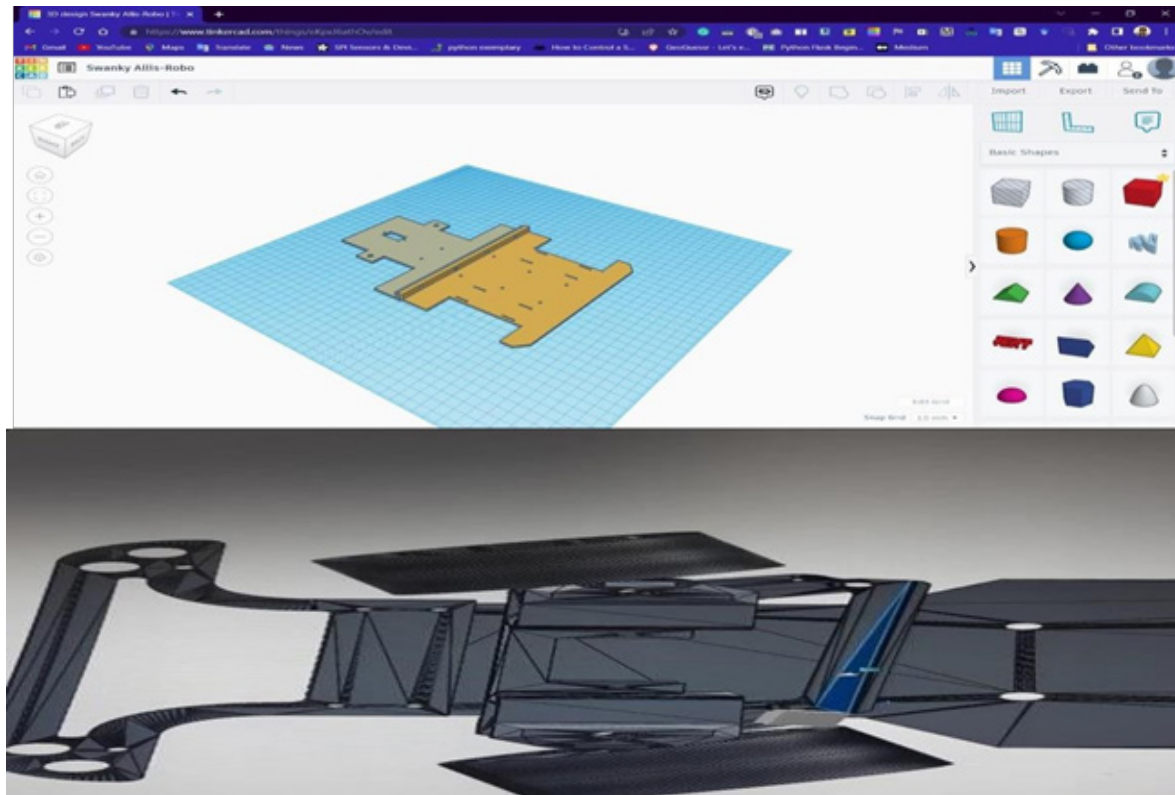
The 3D print chassis of the prototype Mining shuttle.
